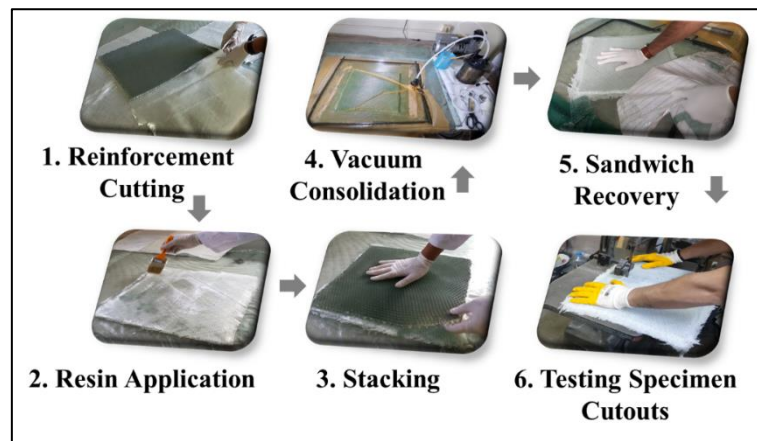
Steps followed during the in-situ fabrication of FRP sandwich panels.
